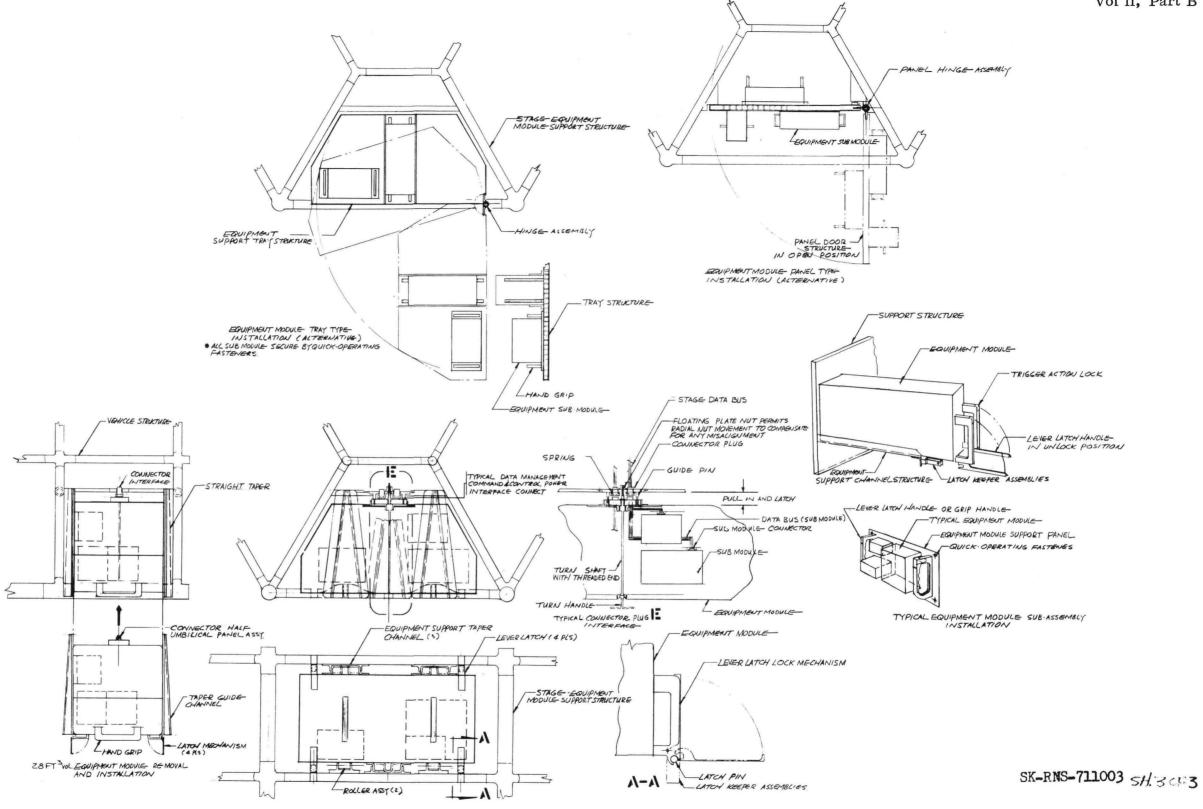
RNS Spaceframe Equipment Arrangement-Installation Techniques
